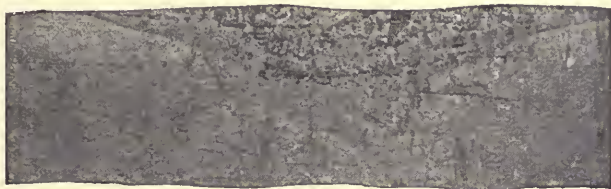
Burnt metal in the upper part of a weld (photograph after corrosion test).
